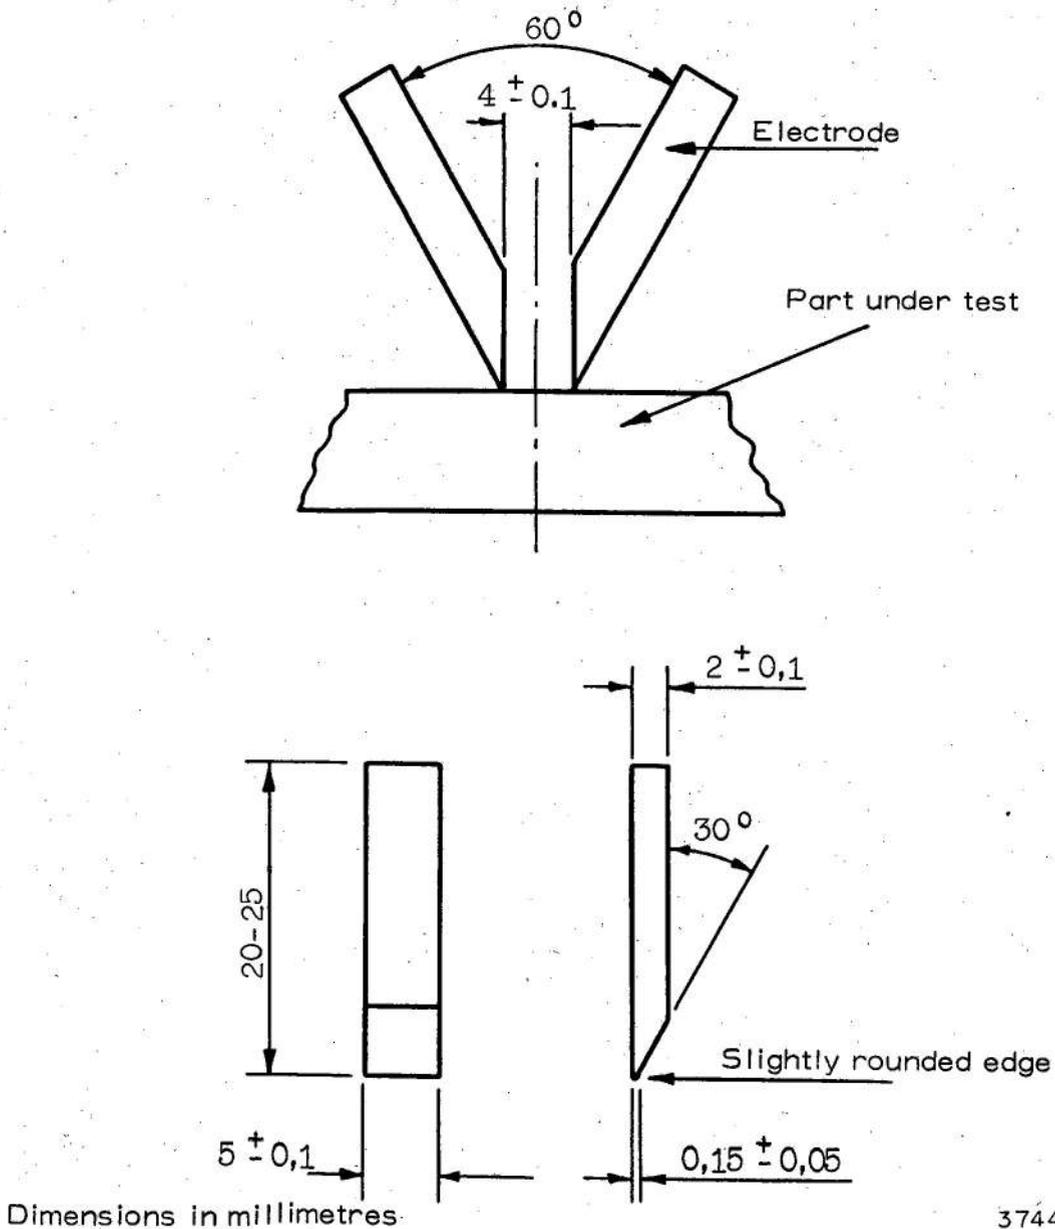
Arrangement and Dimensions of the Electrodes for the Tracking Test
